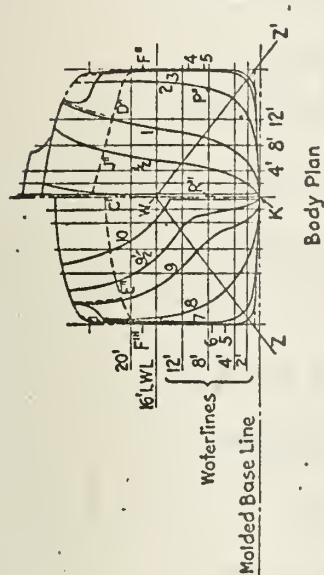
LINES DRAWING OF CARGO STEAMER
